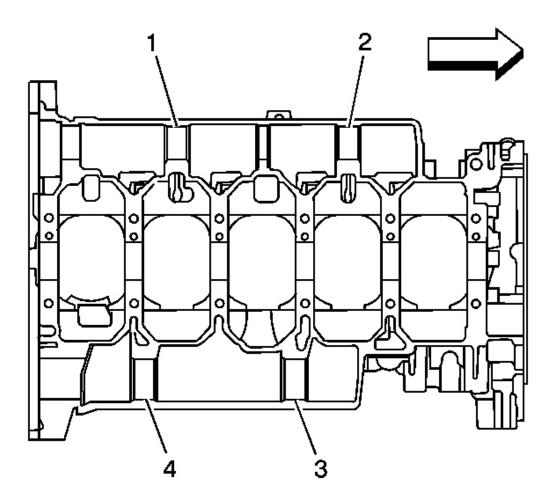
View Of Balance Shaft Journals Courtesy of GENERAL MOTORS CORP.
